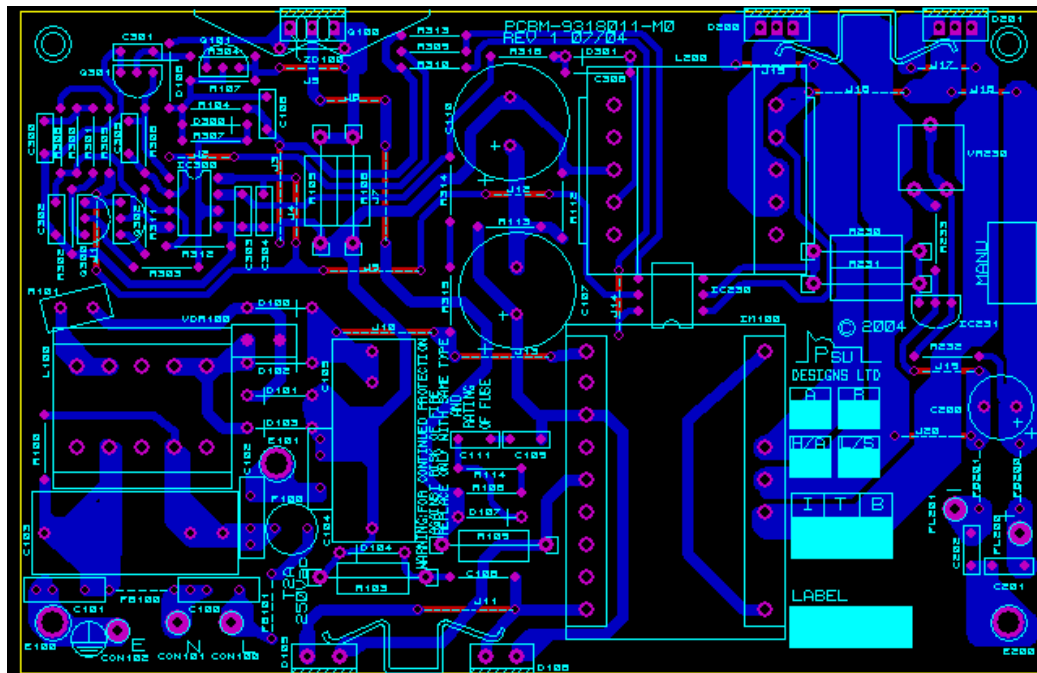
PCB capture of S<sup>4</sup>PFC layout and tracking
